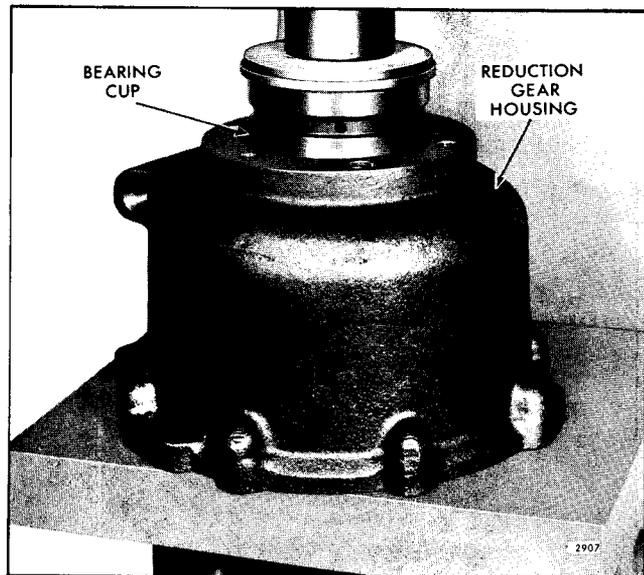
Installing Reduction Gear Drive Shaft Bearing Cup in Gear Housing
